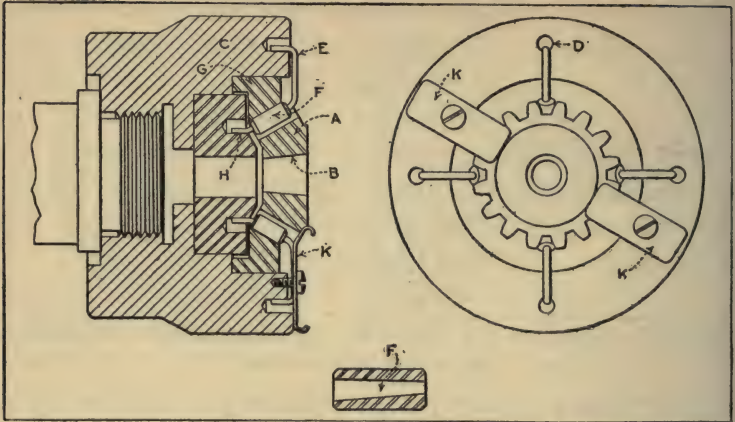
ADJUSTABLE FIXTURE FOR GRINDING A BEVEL PINION
